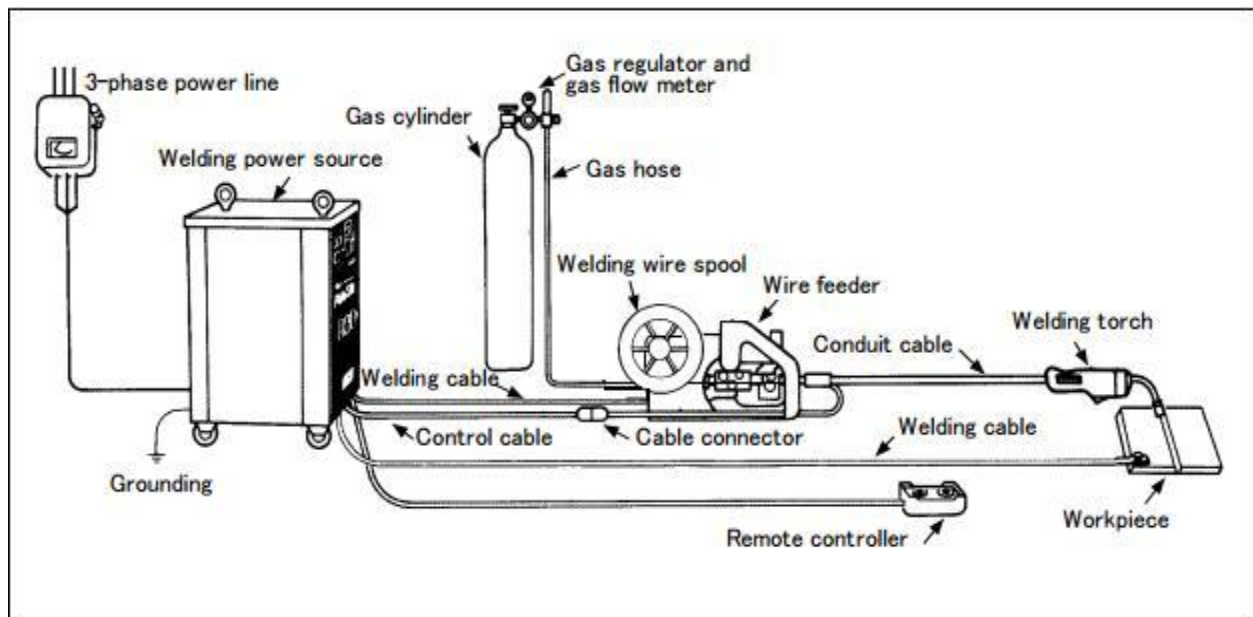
A typical arrangement of gas metal arc welding process. (Source: Kobe, 1995)
